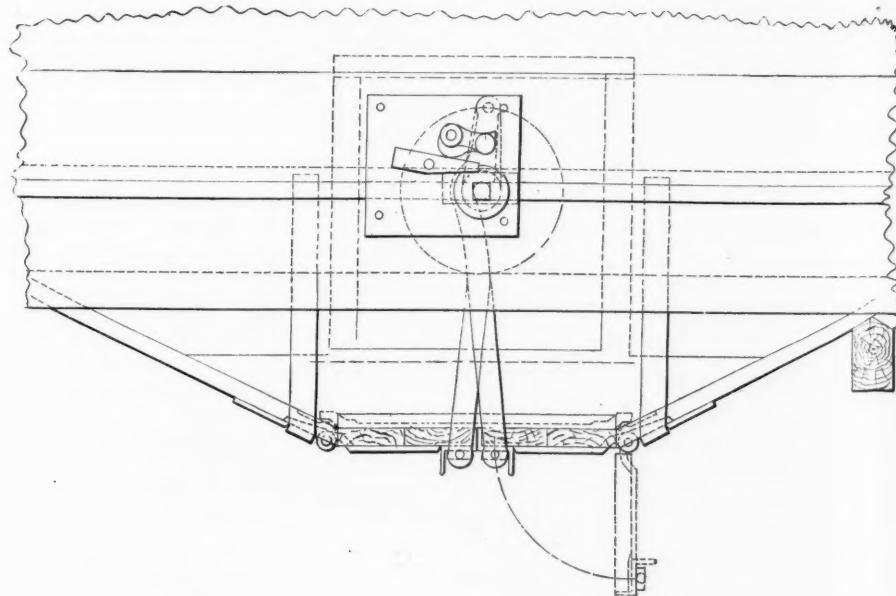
Arrangement with Operating Mechanism at Side of Car.
